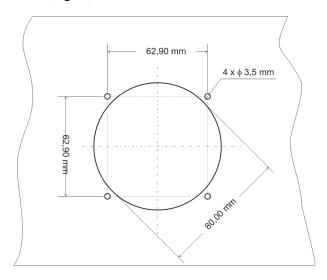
Mounting hole and screw holes measurements (not to scale)
